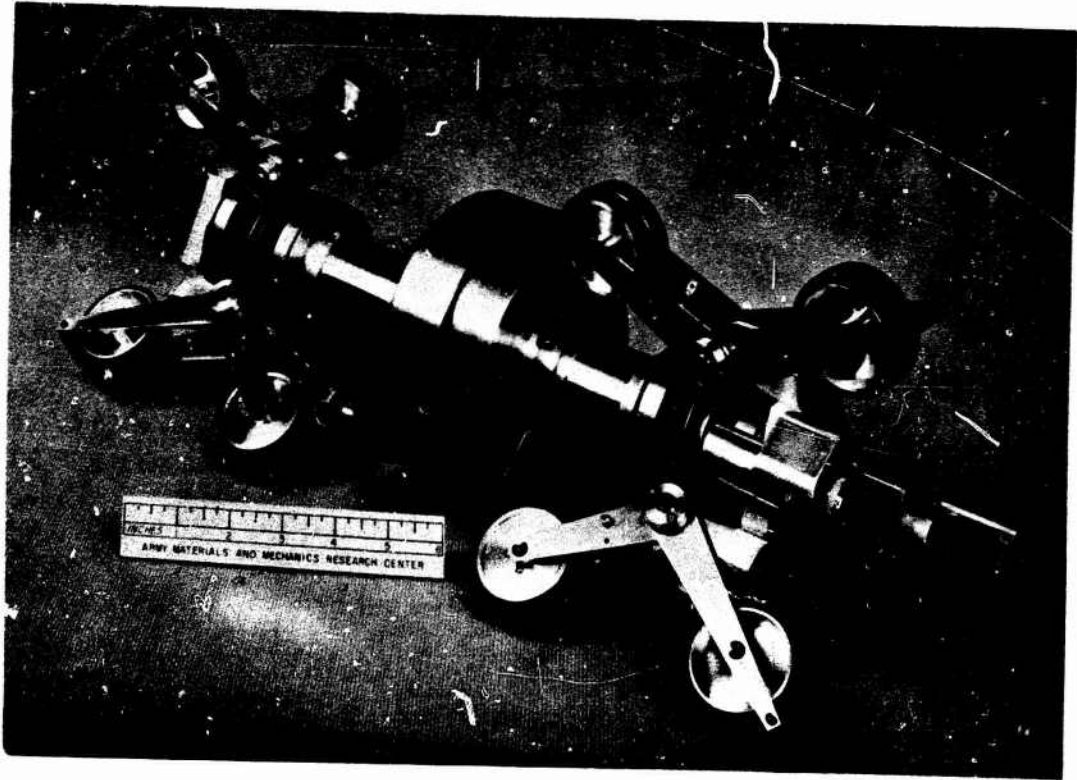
MAGNETIC RECORDING BORESCOPE MODEL VI SCANNING MECHANISM FOR 152-MM THROUGH 175-MM GUN TUBES
